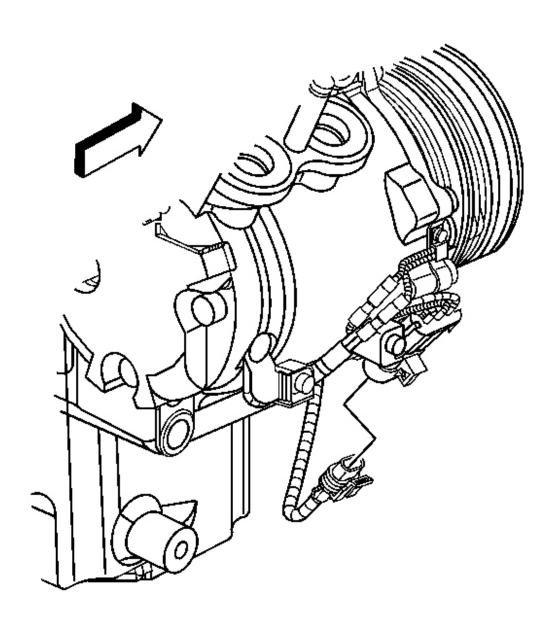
View Of A/C Compressor Electrical Connector Courtesy of GENERAL MOTORS CORP.
